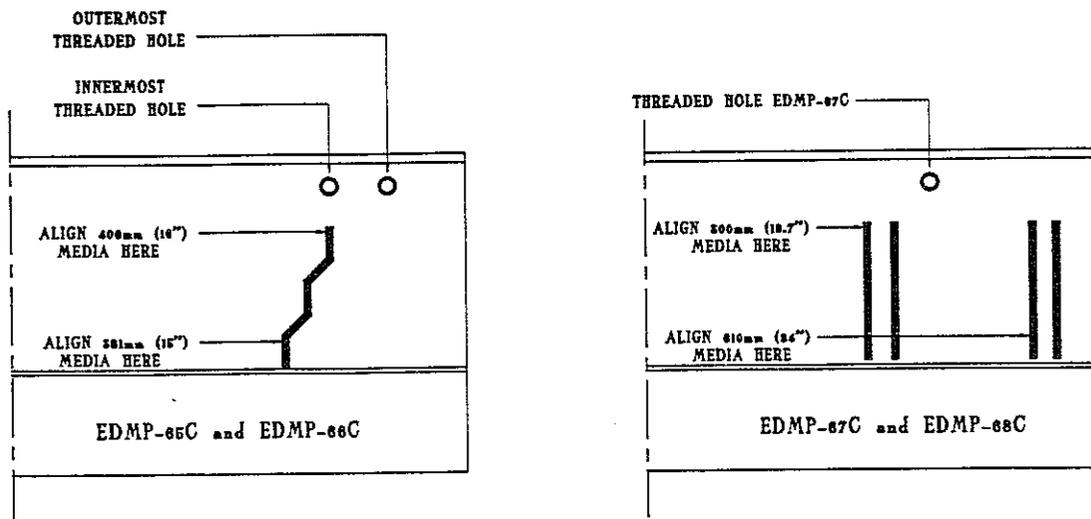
DMP-60C SERIES CHART ALIGNMENT MARKER AND THREADED HOLES ON PLATEN
